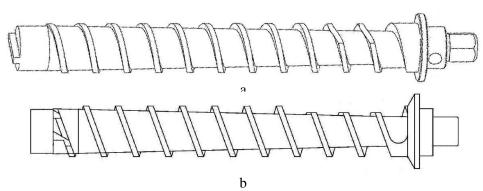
An improved ridge of the screw cutting of the screw feed section: a – Patent No. CN204488078U; b – Patent No. CN203739263U
